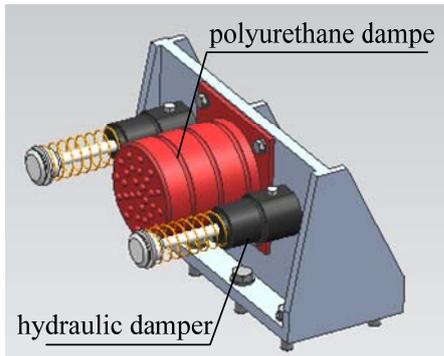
FIGURE VI. THREE-DIMENSIONAL MODEL OF BUFFER MECHANISM
